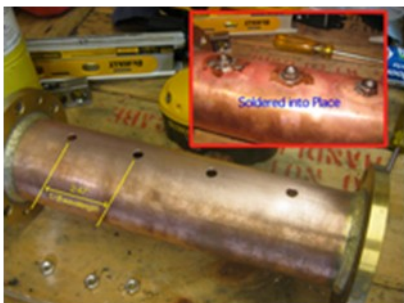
Shown is a section of rigid coax with holes drilled at one-eighth wavelength after the nuts have been soldered in place.
